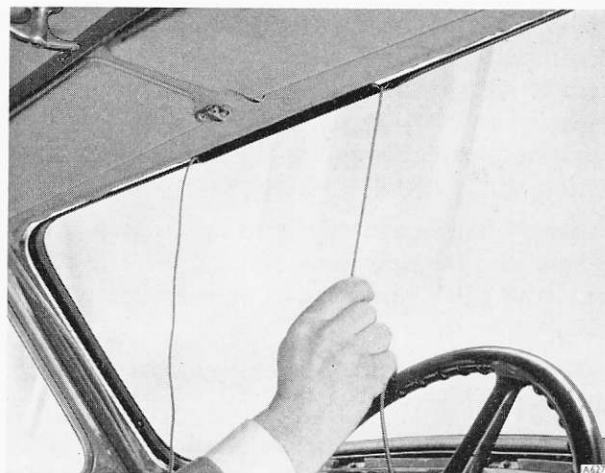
View of windscreen showing cord in position for fitting the rubber seal
